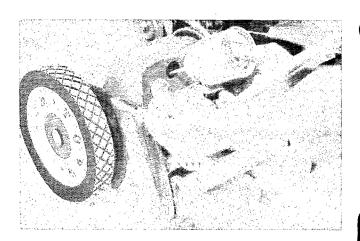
Note that the countershaft can be lubricated by removing the small chromium plated circular cap so the oil hole in the countershaft can be reached by the oil can spout.
